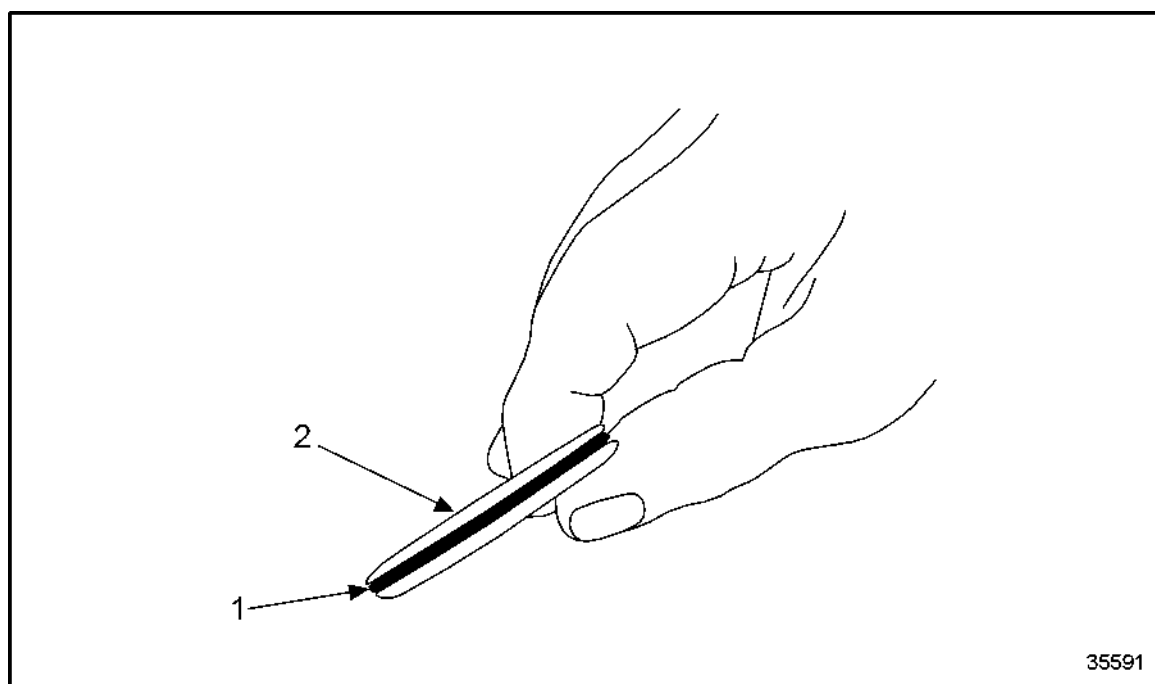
Installing Impeller and Cleaning Rotary Seal Surface
